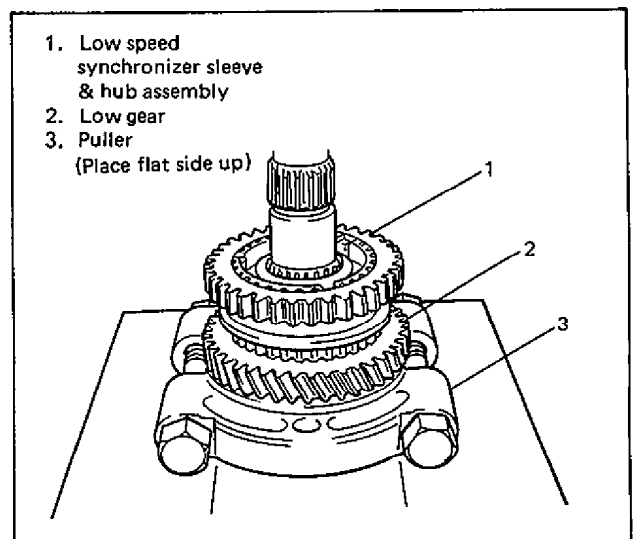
A-59 Removing Low Speed Sleeve & Hub
